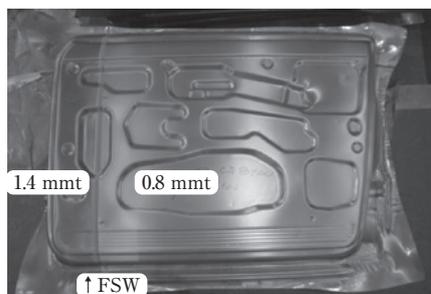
FSW tailored blanks for a prototype door inner of 5182-O-0.8/1.2 mm.
